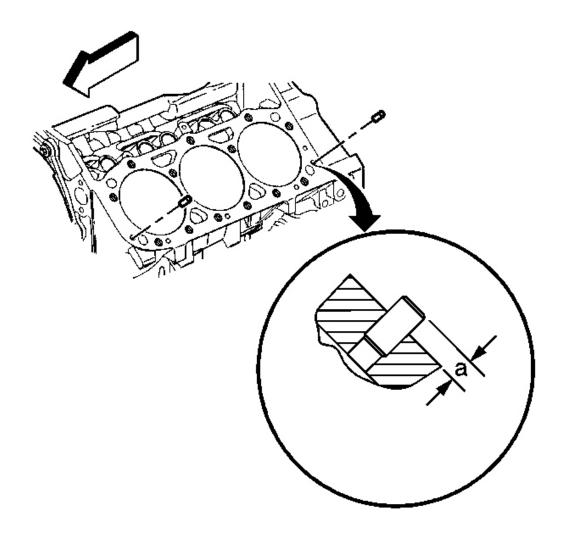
Left Side Cylinder Head Locator Dowel Pins Proper Installation Position Courtesy of GENERAL MOTORS CORP.
